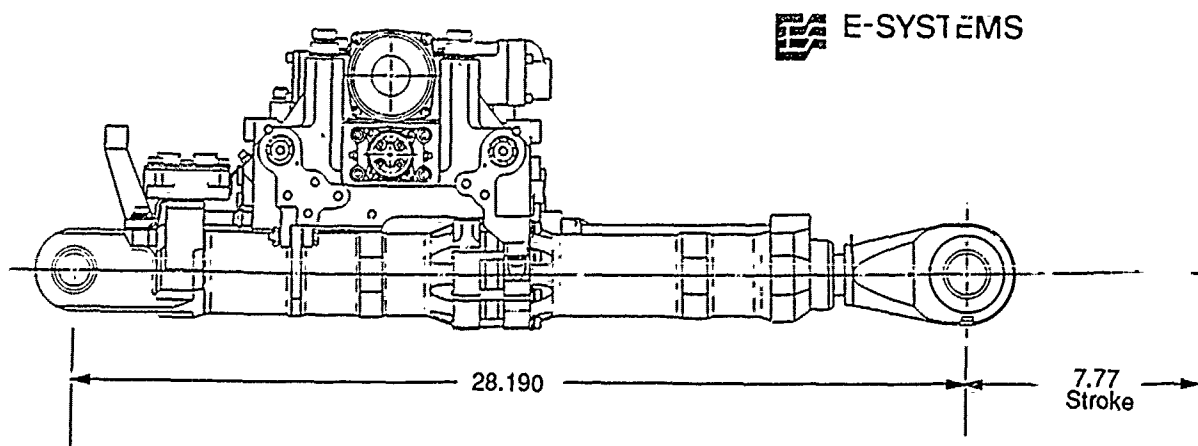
E-Systems - Stabilator Servoactuator Outline Drawing
